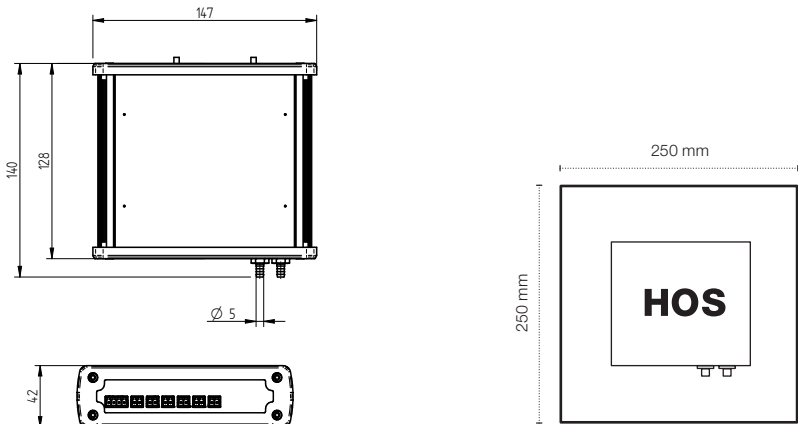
/ HOS control unit dimension / Revision opening dimensions
